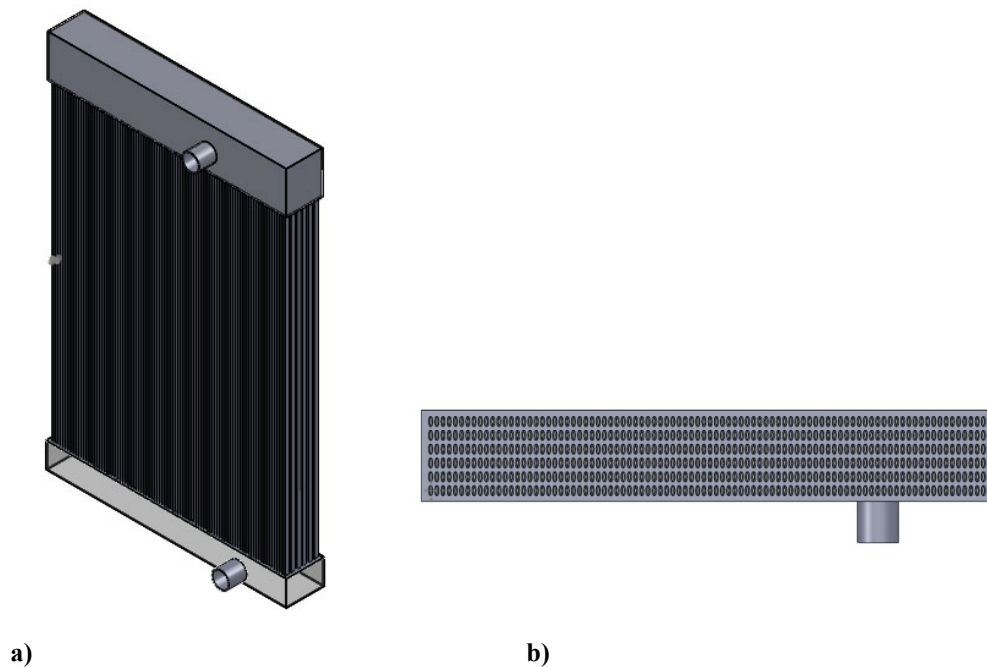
a) CAD Model of supplied radiator b) Top view of the CAD model [3]
